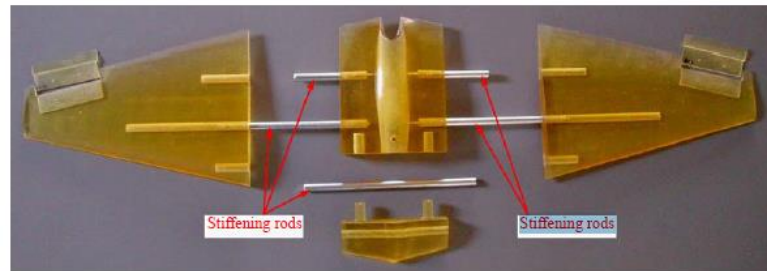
ILAS Model Before Final Assembly with Five Reinforcing Rods [29]
